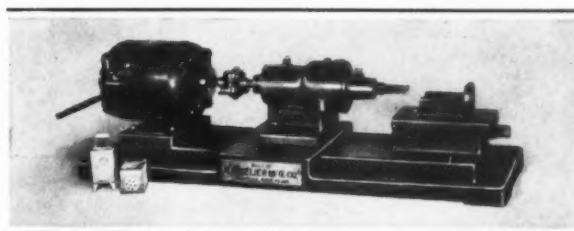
Bench Machine which Drills Seven Holes to Close Center Distances
